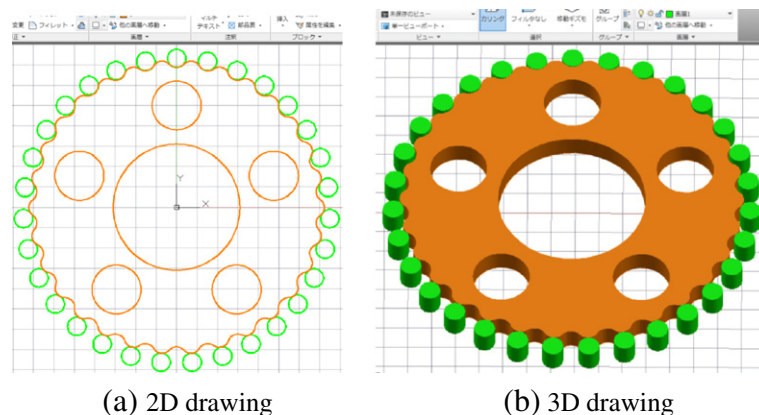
2D and 3D of drawings of the trochoidal gear engaging with pin gear.
